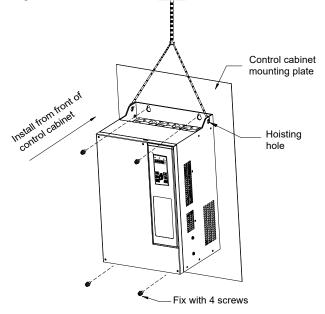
Wall-mounted Installation Diagram of Sheet Metal Structure
